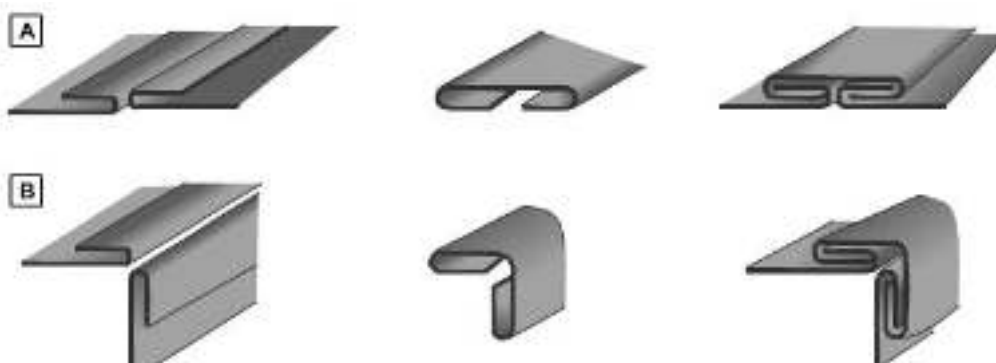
(A) cap strip seam, (B) locked corner seam
